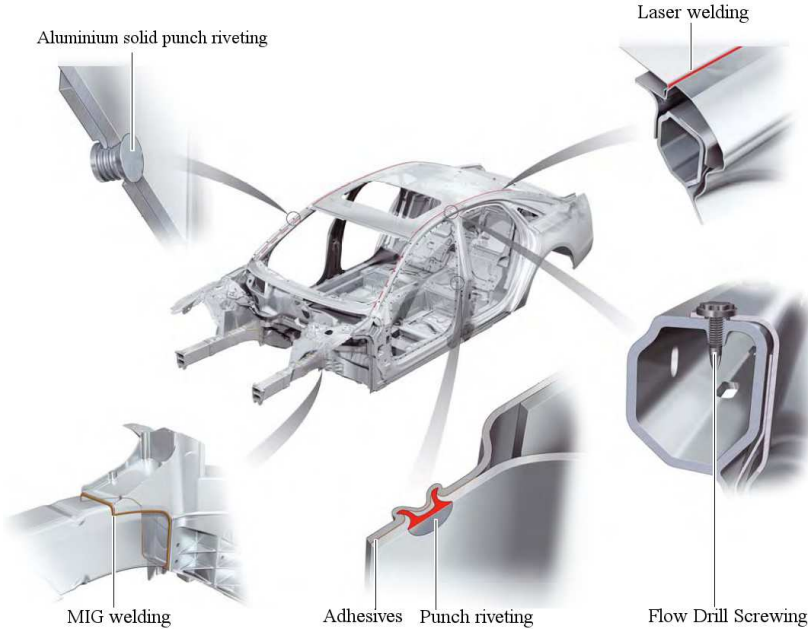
Joining techniques used to join the body in Audi A8 '10 [17].
